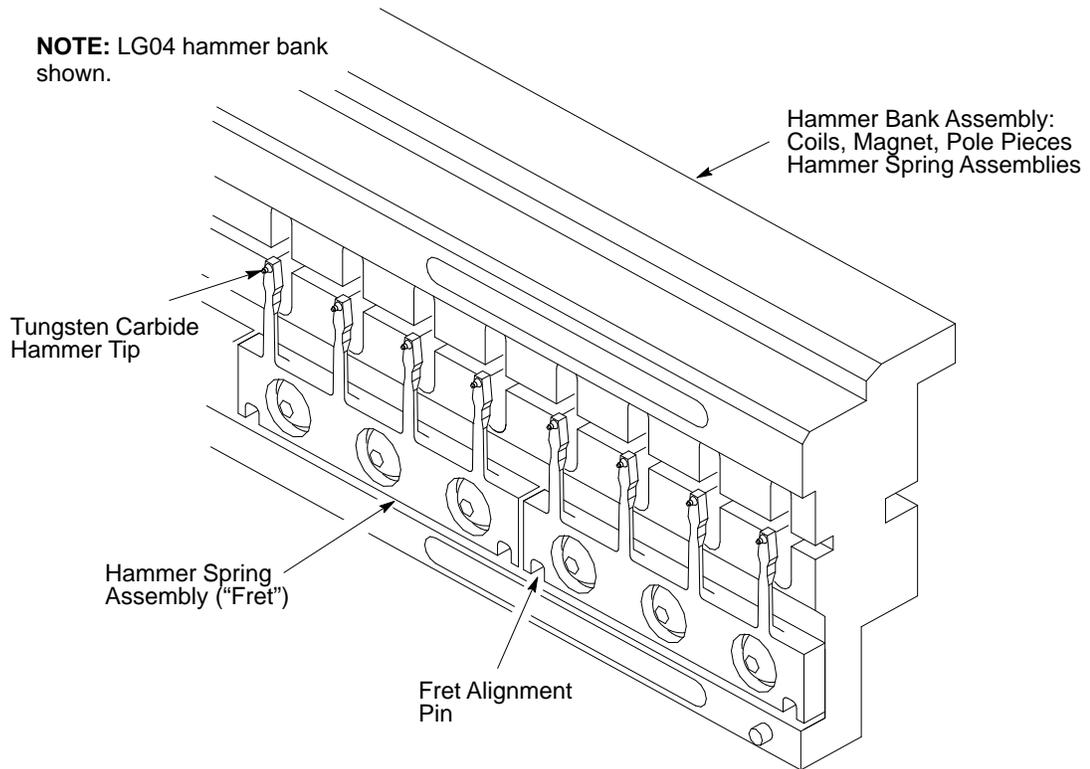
Hammer Springs and Hammer Bank (Detail)
